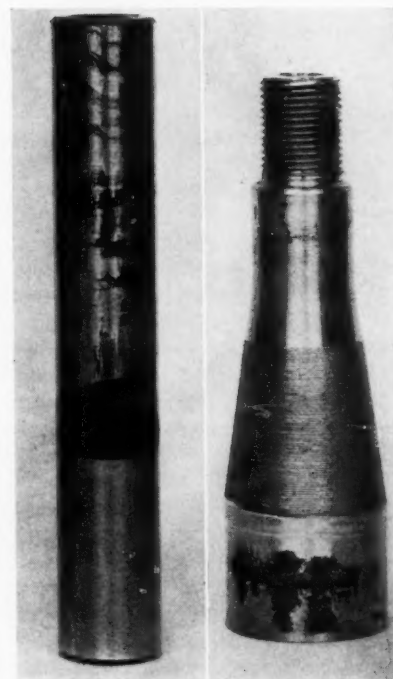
EXAMPLES OF CORROSION IN OTHER AUTOMOBILE PARTS
